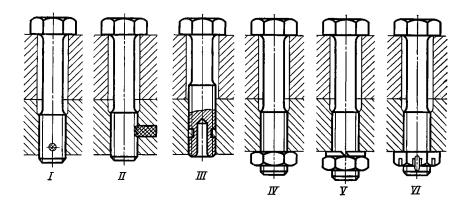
Locking cap screws at threaded shank I—by cotter pin; II—by elastic insert; III—by upsetting shank end; IV—by lock nut; V—by lock nut with spring ring; VI—by slotted nut with cotter pin
